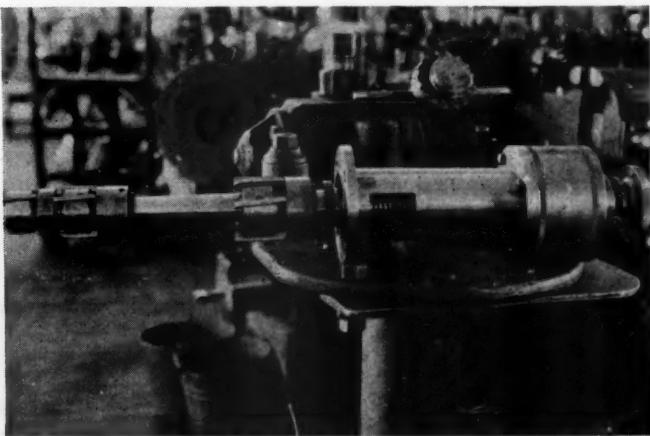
A line reamer for finishing the main-valve bushings on a cross-compound air compressor
